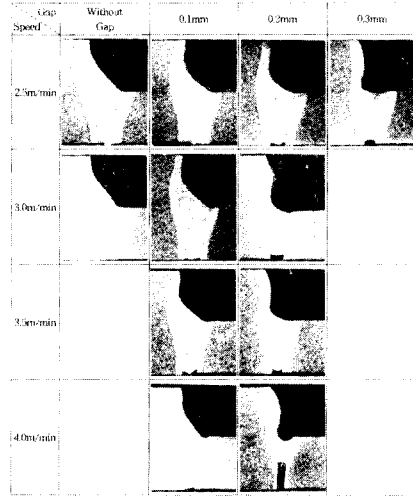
(c) Macrographs of cross-sectioned weld beads with different welding speed in case of 4mm+2mm combination
